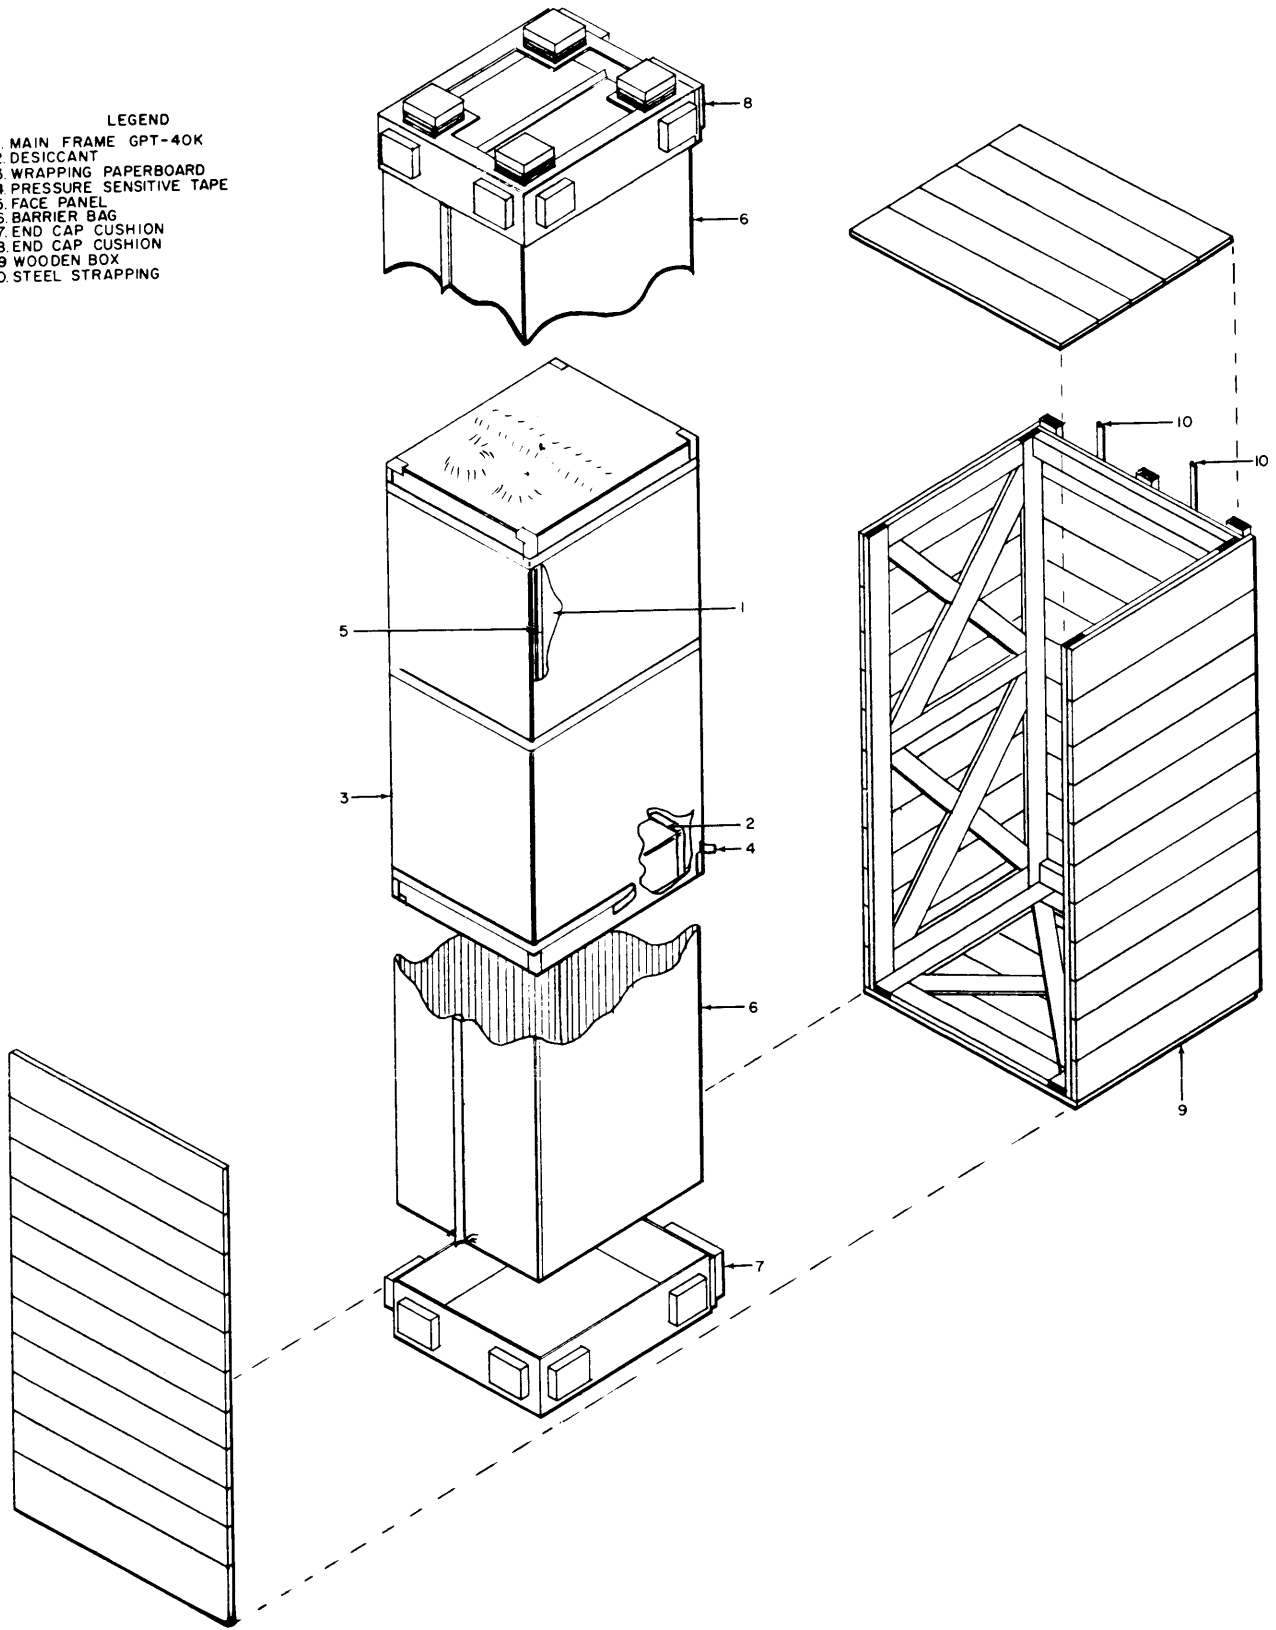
Typical Equipment Packaging (Sheet 1 of 3)
